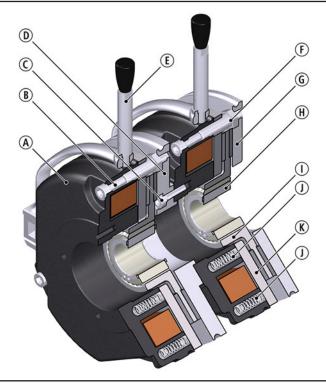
Design of the INTORQ BFK458 spring-applied brake: Basic module N, doubled design with intermediate flange
